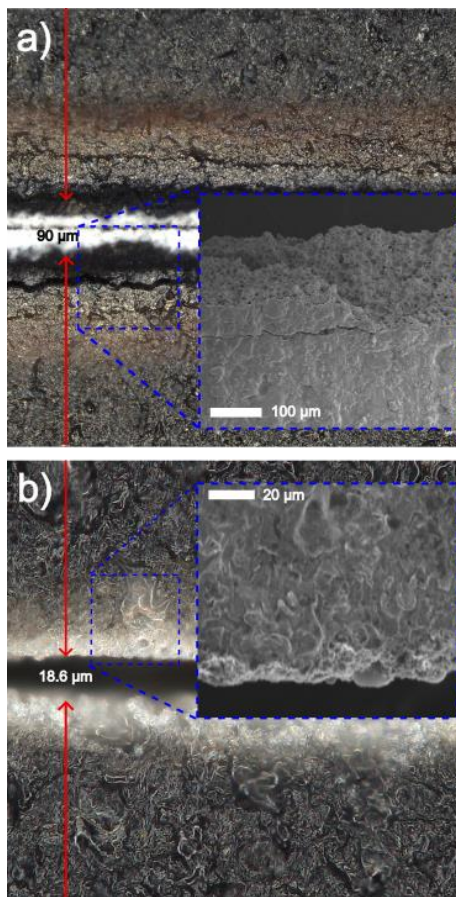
a) Sample cut of mold compound diced in air. b) Sample cut of mold compound diced in liquid.
